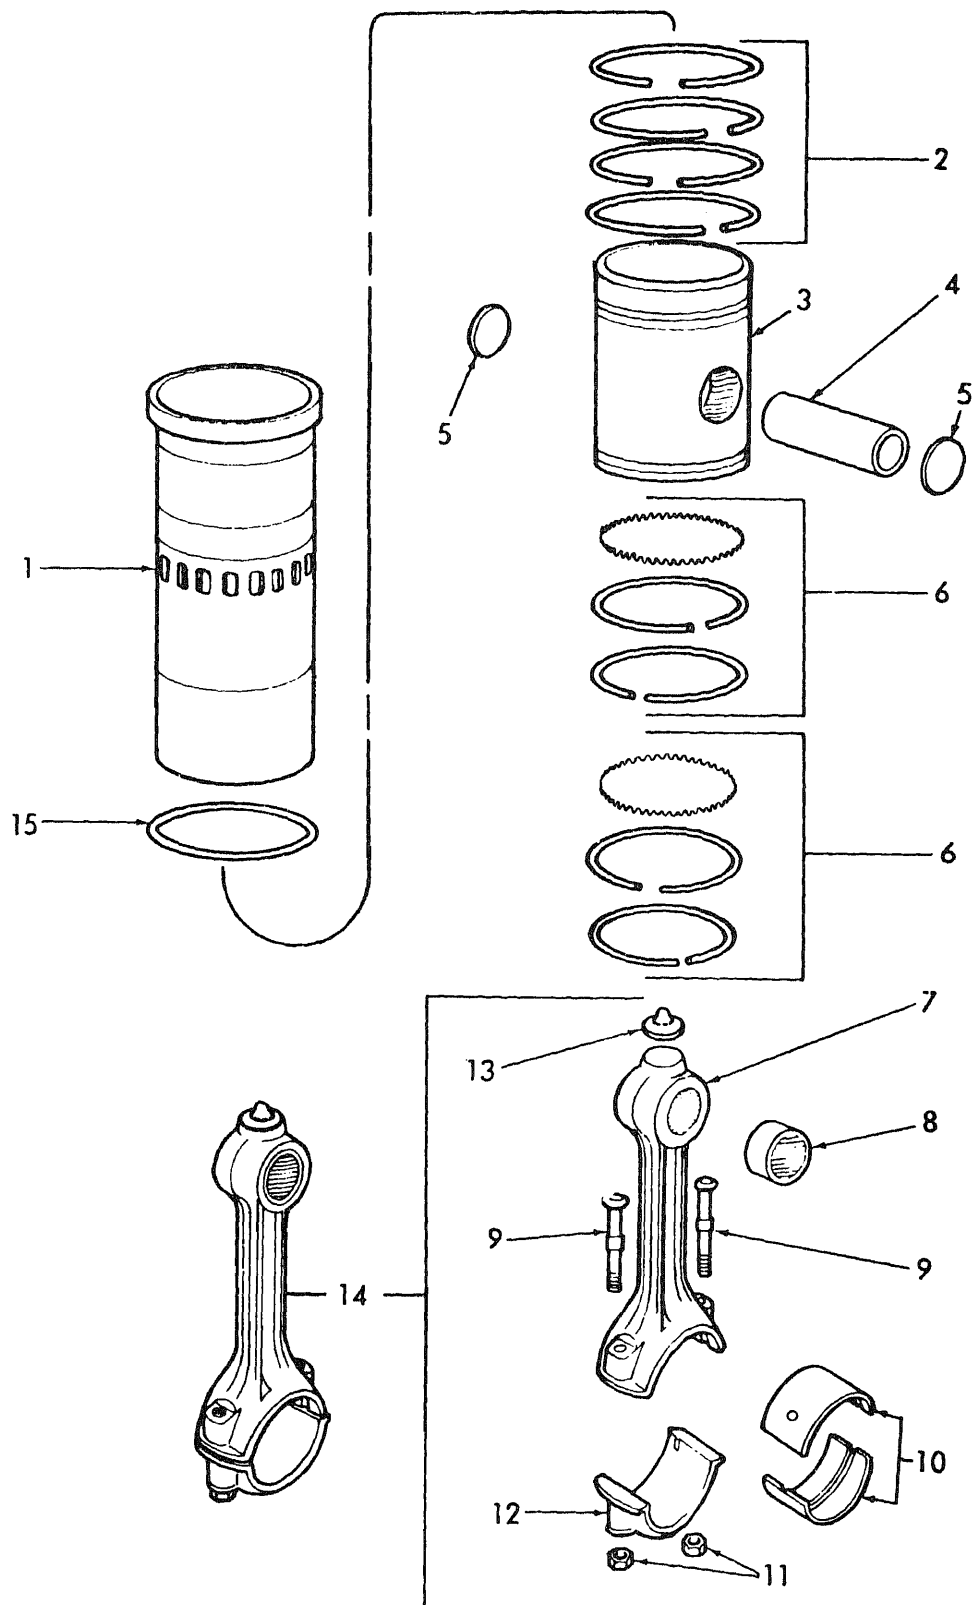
Piston and ring assembly, connecting rod, and cylinder liner, exploded view.
